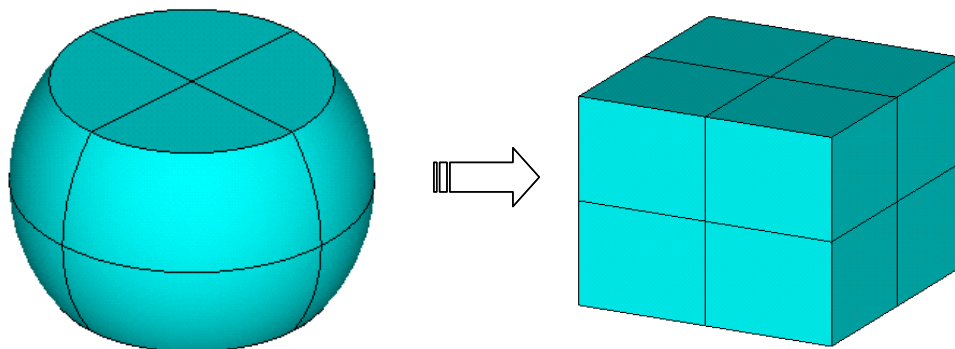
Solder ball and its effective solder joint with cubic cross section.
